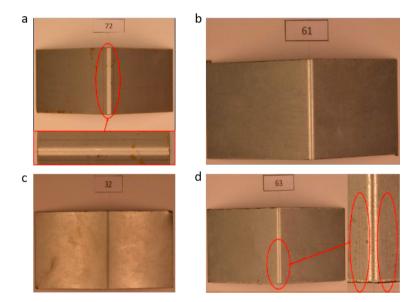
Example of aesthetical defects on a specimen bent with (a) metal tools; (b) polyurethane insert tools; (c) rubber insert tools; (d) nylon insert tools.
